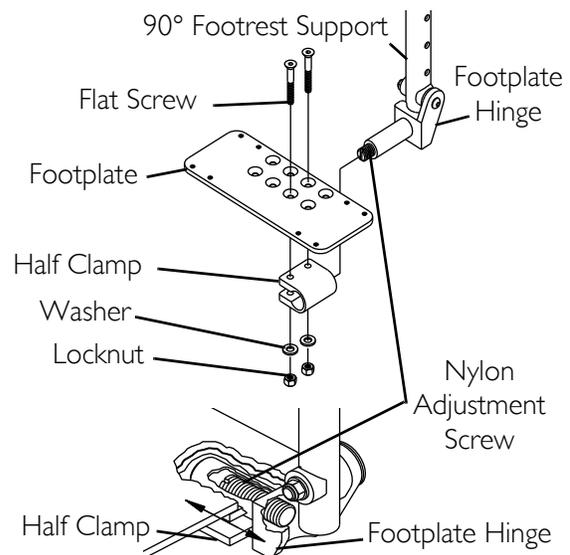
Installing Adjustable Angle Flip-up Footplate Hinge
